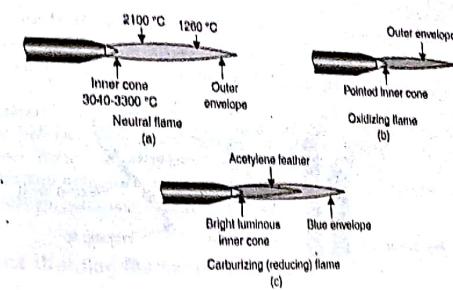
Three Basic Types of flames Used in Oxyacetylene Gas Welding and Cutting Operations: (a) Neutral Flame, (b) Oxidizing Flame, and (c) Carburizing or Reducing Flame
